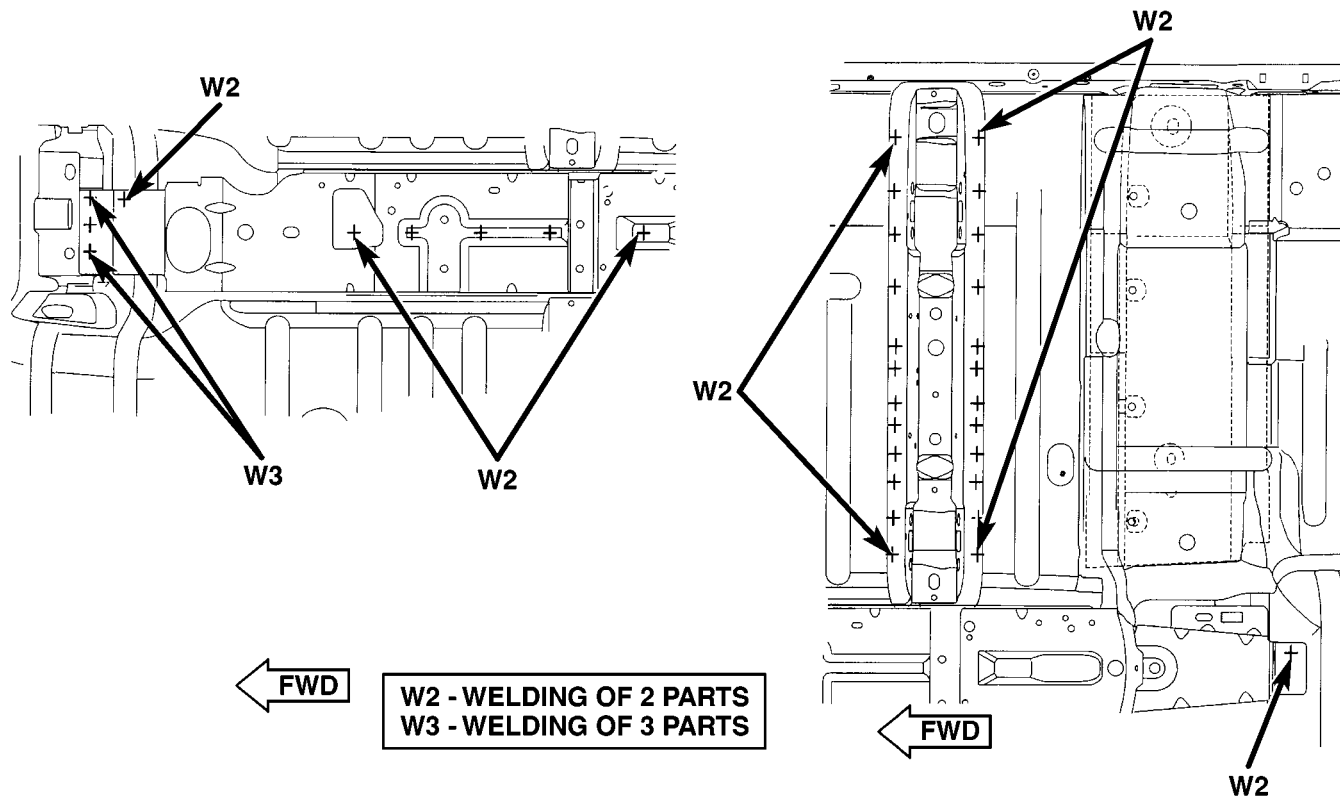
WHEELHOUSE UPPER DECK REINFORCEMENT TO UPPER DECK REAR REINFORCEMENT AND UPPER FRONT REINFORCEMENT
